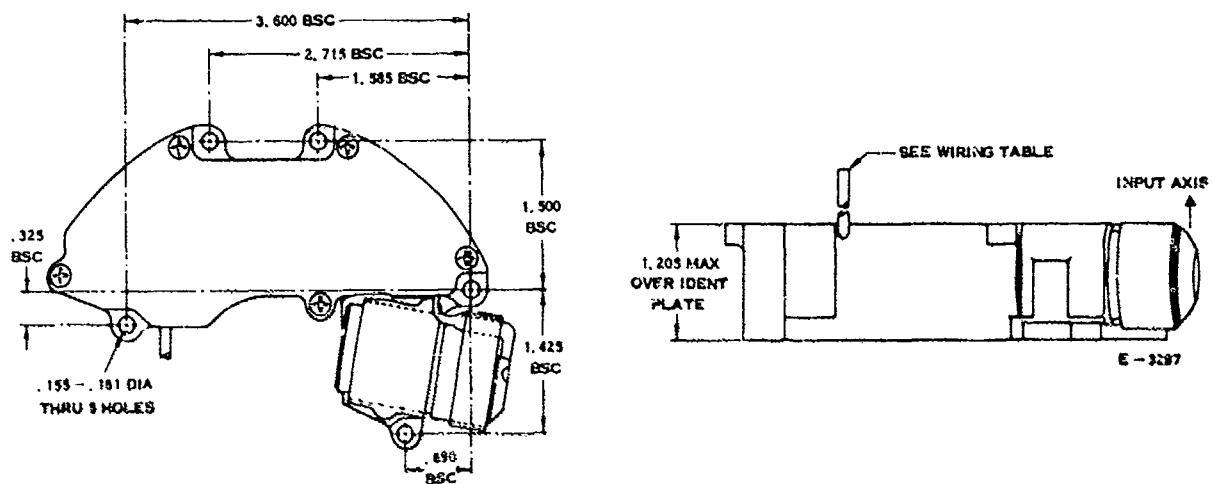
COPPERHEAD ROLL RATE SENSOR INSTALLATION DRAWING
